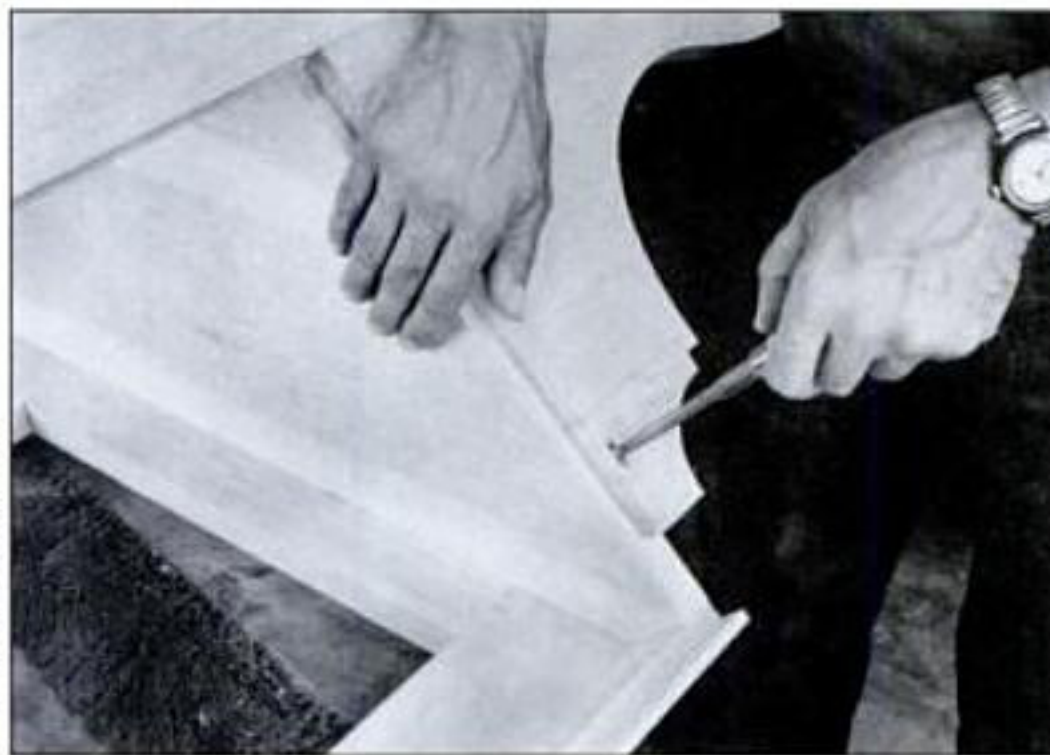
REAR-CORNER AND TAILPIECE ASSEMBLY
